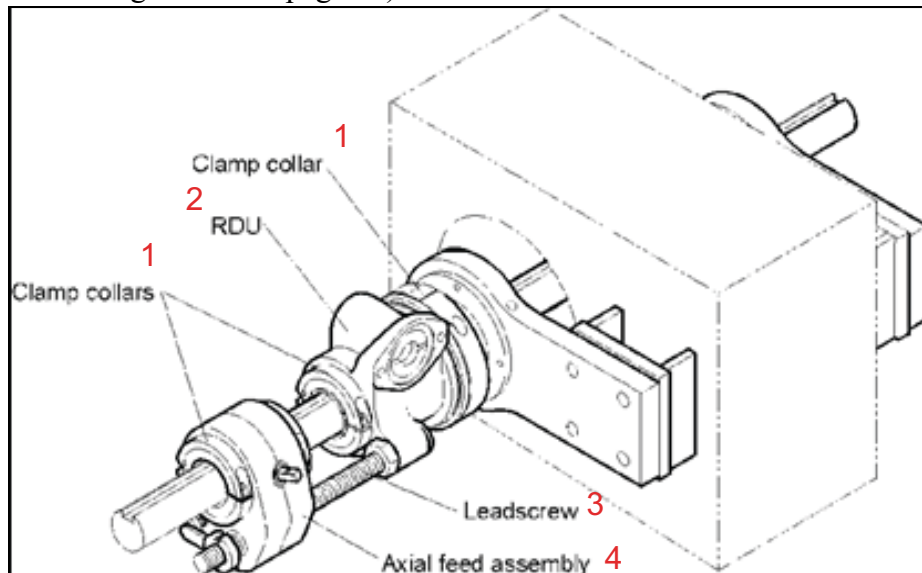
AFU DISASSEMBLY COMPONENTS
